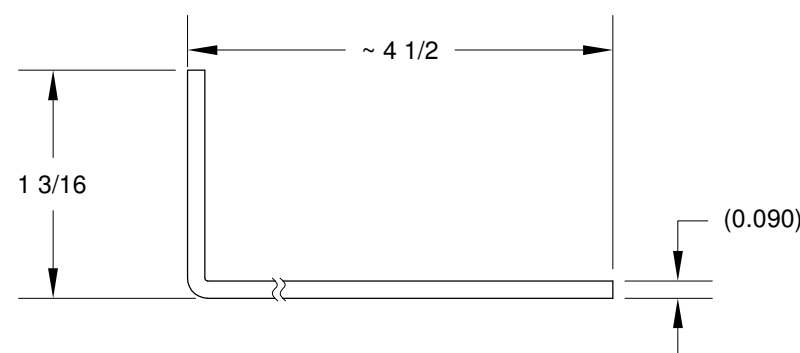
FABRICATING THE COWL TOP RIGHT HINGE PIN
